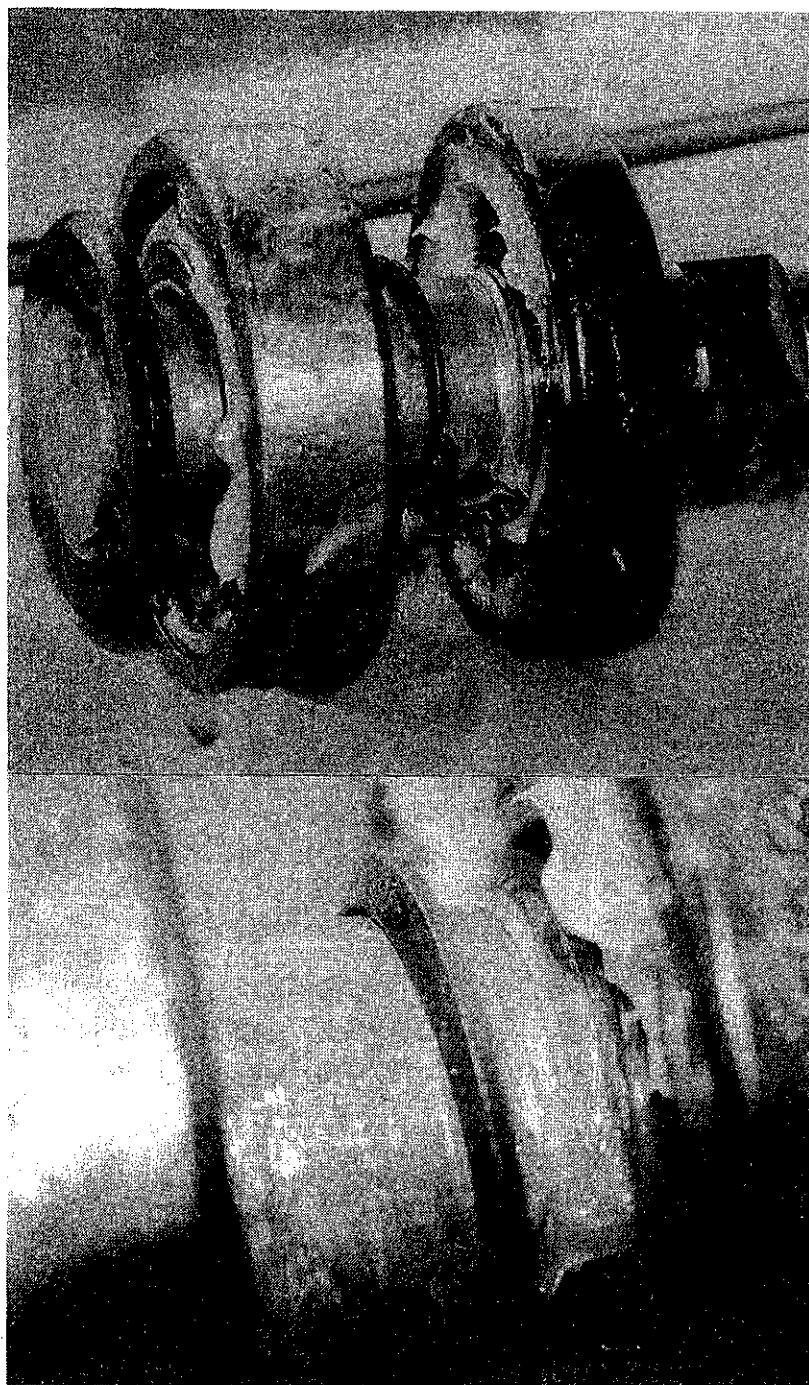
Photograph of deep groove ball bearing idler showing displaced retaining circlip and damaged circlip groove.
